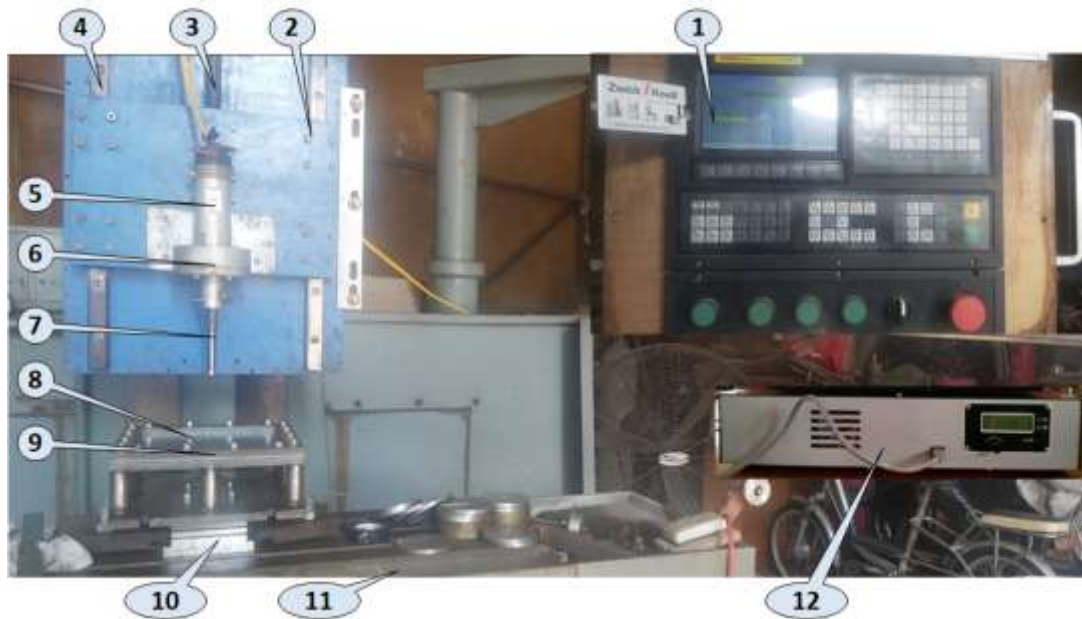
The UV-ISF system after design, fabrication and assembly:
